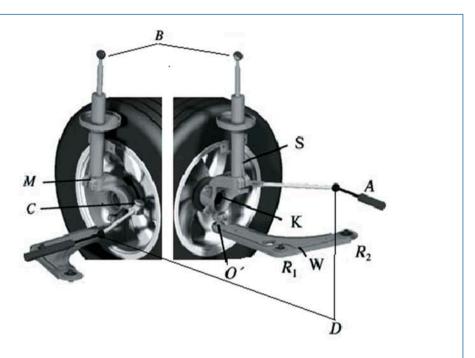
The McPherson suspension elements for the right front wheel. A – steering rack–body translational joint, B – body - strut spherical joint, C – steering tie rod–strut–knuckle spherical joint, D – steering rodsteering rack spherical joint, K – knuckle, M – damper tube, O' – wishbone–strut–knuckle spherical joint, R, – bushing, R, – bushing, S – strut, W – wishbone
